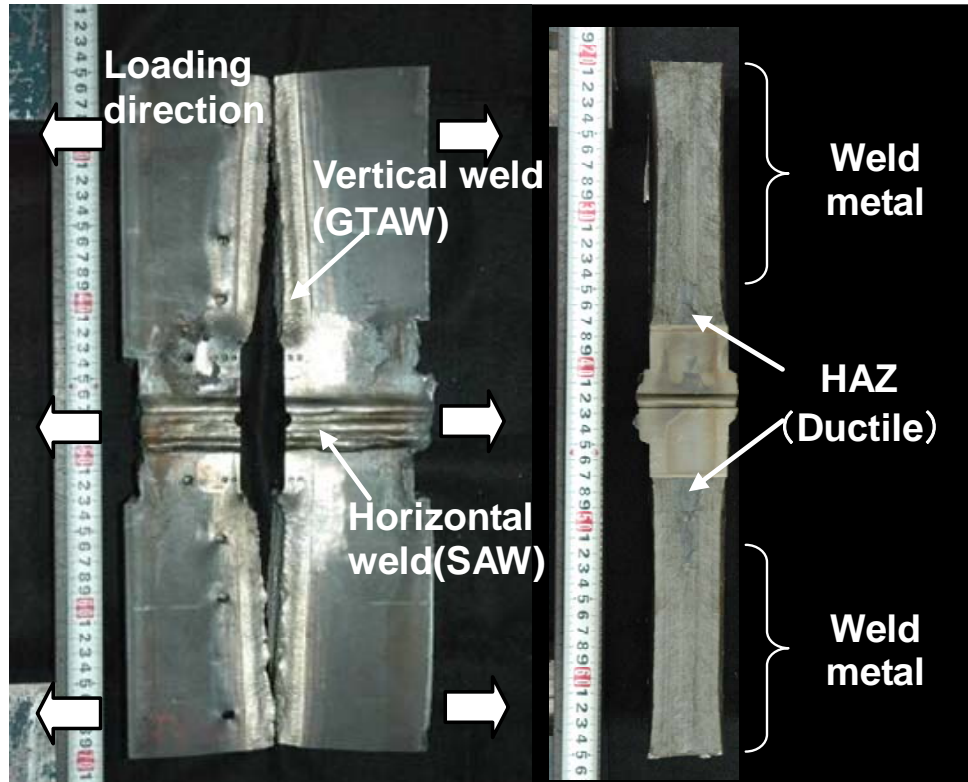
Fracture path and fracture surface of cross weld notch wide plate test (50mm, GTAW)
